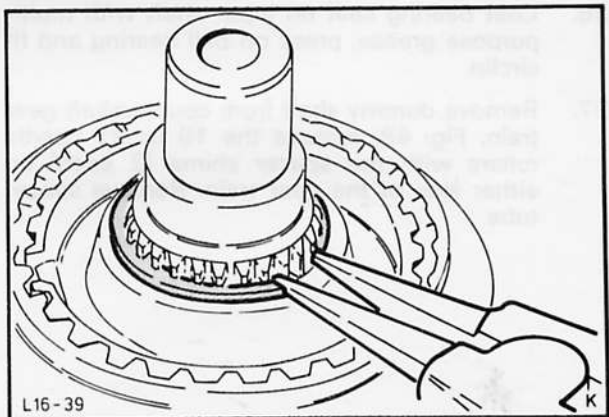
Fit circlip to 3rd/4th gear synchroniser hub
